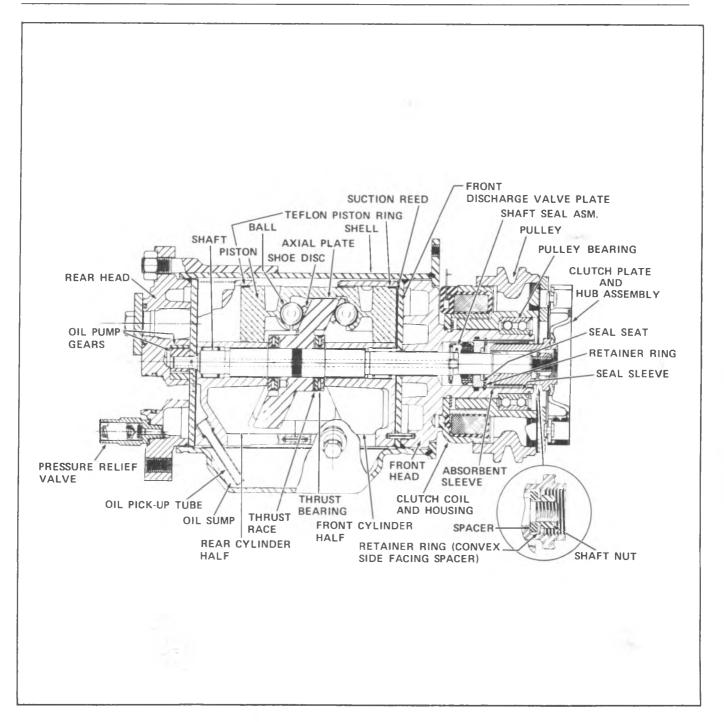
B-4-Axial Six Cylinder Compressor-Cross Sectional View
